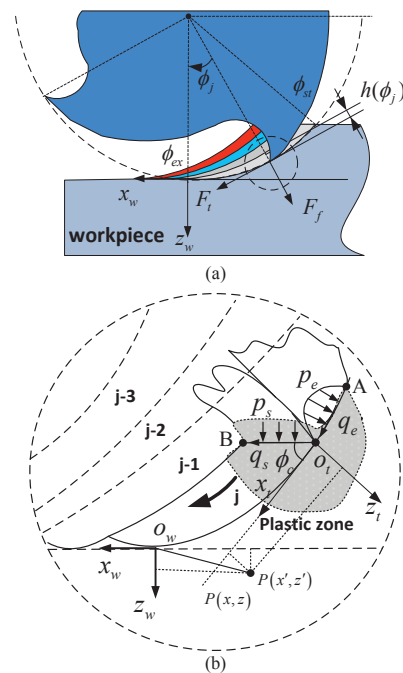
(a) Global geometry of 2D orthogonal flank milling; (b) loading of shear plane and flank wear land at the newly formed surface.
